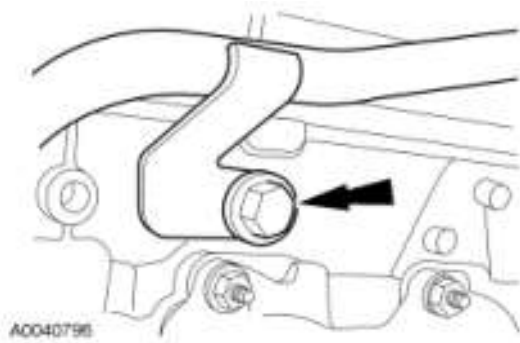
Installing Transmission Fluid Filler Tube Bolt
